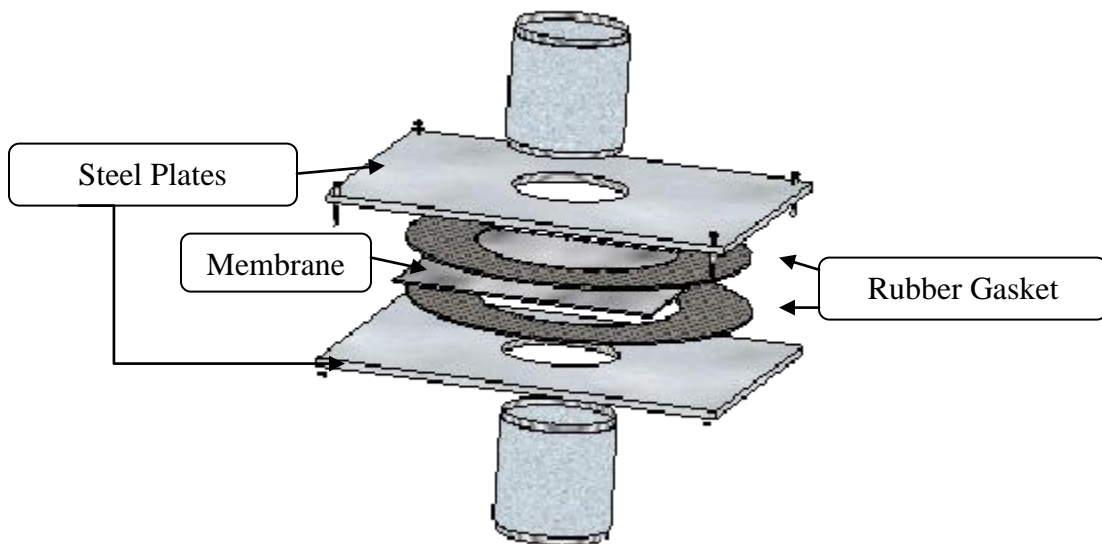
An Exploded View of the Membrane Holder with the Membrane in it
